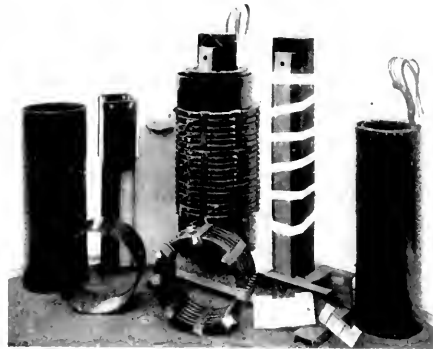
THE PRINCIPAL PARTS ENTERING INTO THE ASSEMBLY OF A HIGH-VOLTAGE CORE-TYPE TRANSFORMER
